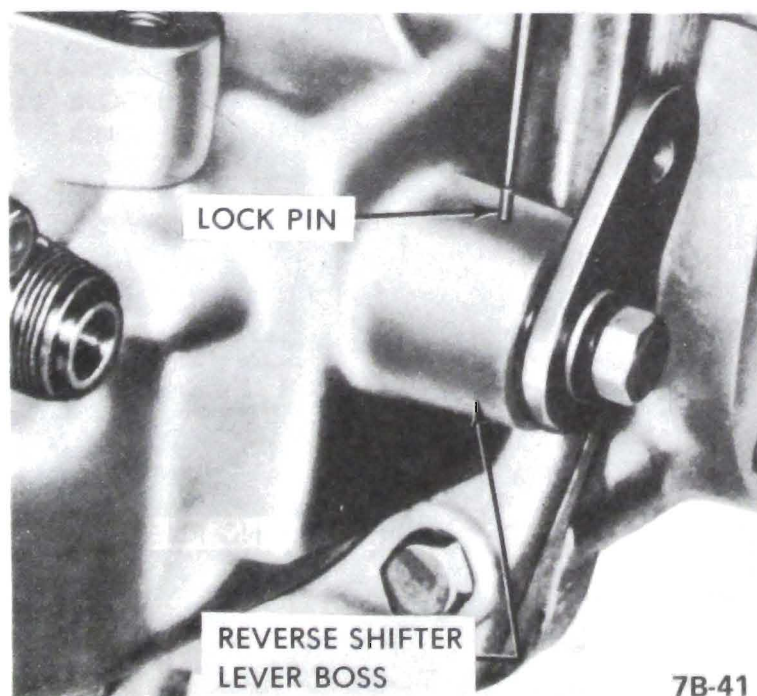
B-41 - Removing Shifter Shaft Lock Pin
